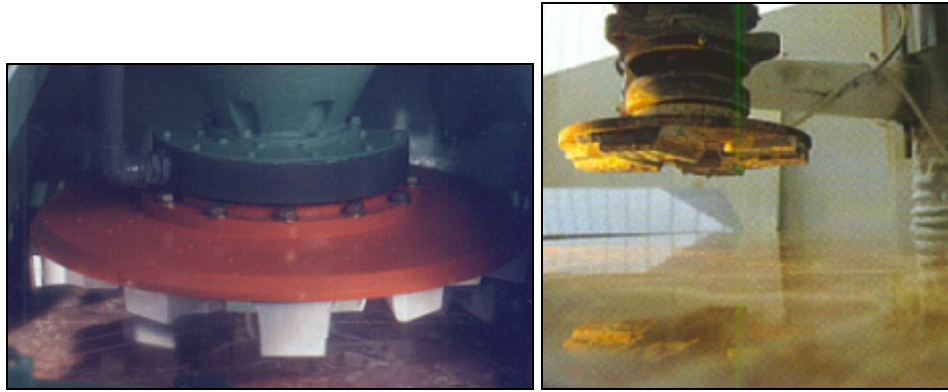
“Frankfurt” tools employed in a processing line (left) and in a manual machine (right)
